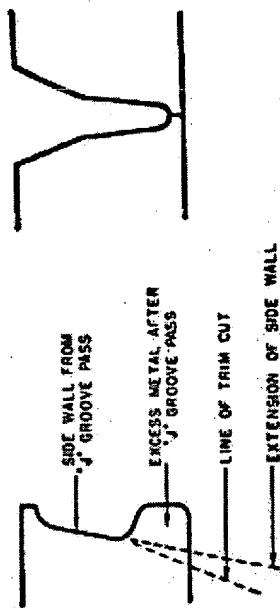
Two-pass technique of J-grooving followed by oxygen cutting.
